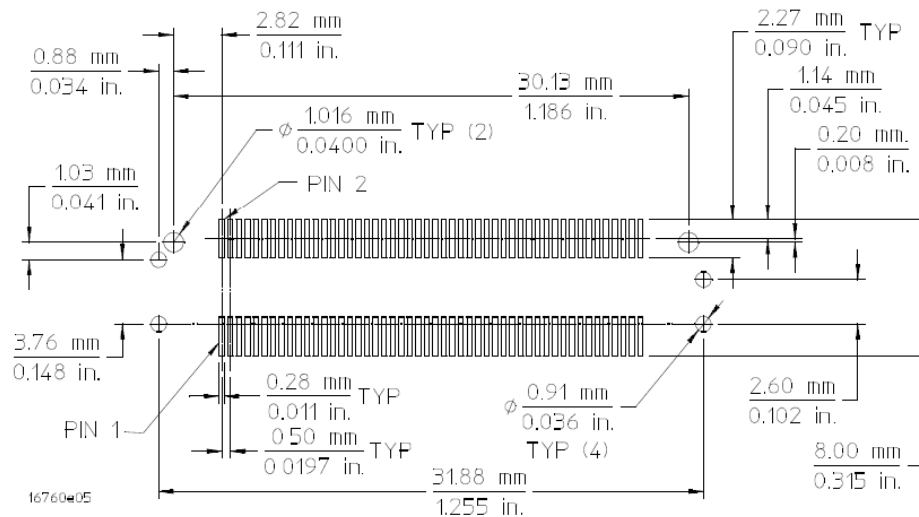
100-pin Samtec connector footprint and support shroud mounting hole dimensions
